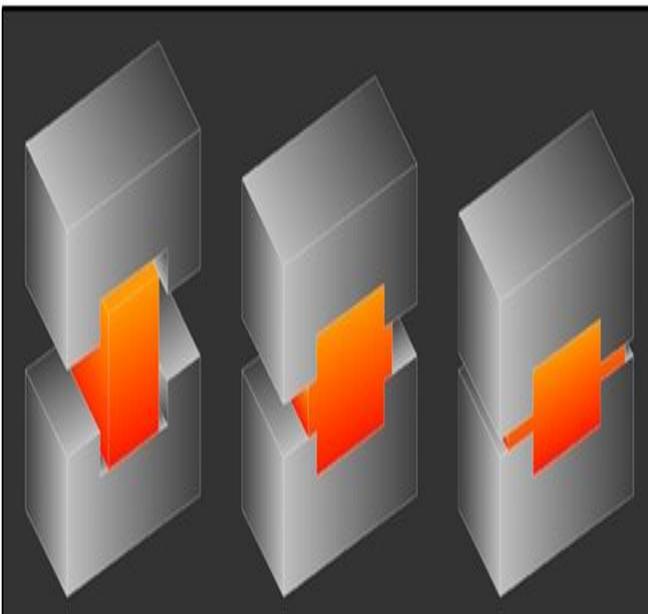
Illustration of (a) Open Die forging, (b) Closed Die forging and (c) Impression Die forging.
